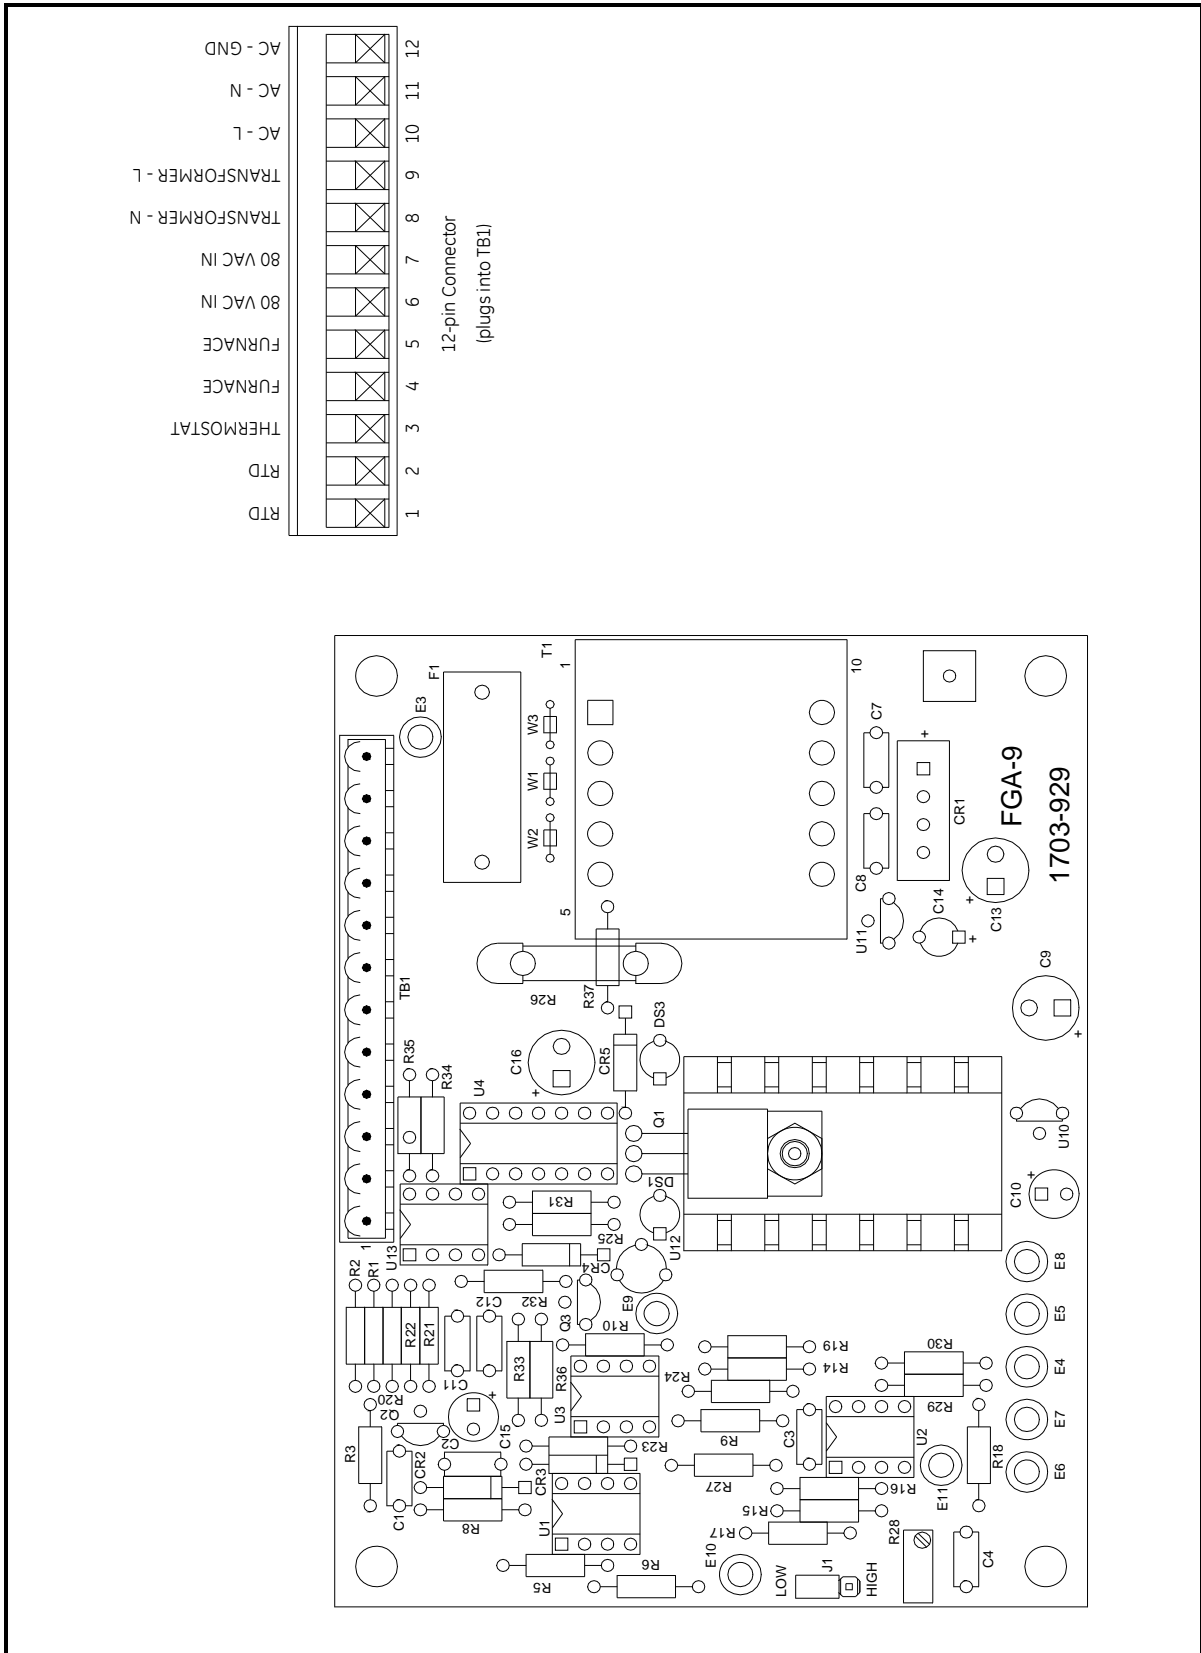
FTC Circuit Board - Previous (Drawing #1703-929)
